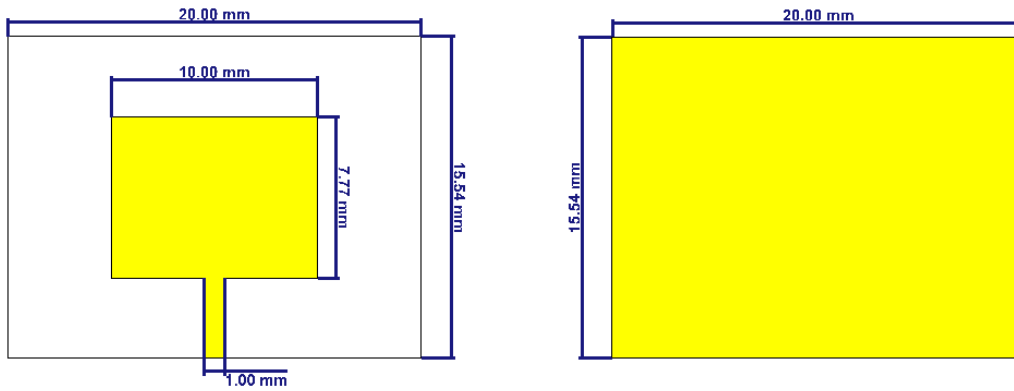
Dimensions of the designed PCB patch antenna (Left - Front side and Right – Back side)
